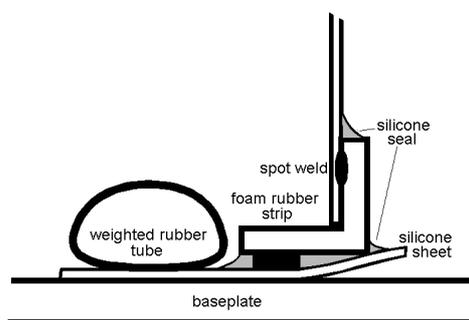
Detail of the seal. The flange around the base of the box has a foam rubber strip stuck underneath it. A wide silicone rubber strip is fixed to the flange with silicone sealant. The foam rubber gives space for the sealant and tilts the silicone so that it tends to press against the base plate. The seal is reinforced by weighted cycle inner tubes laid around the wide skirt which extends over the base plate.
